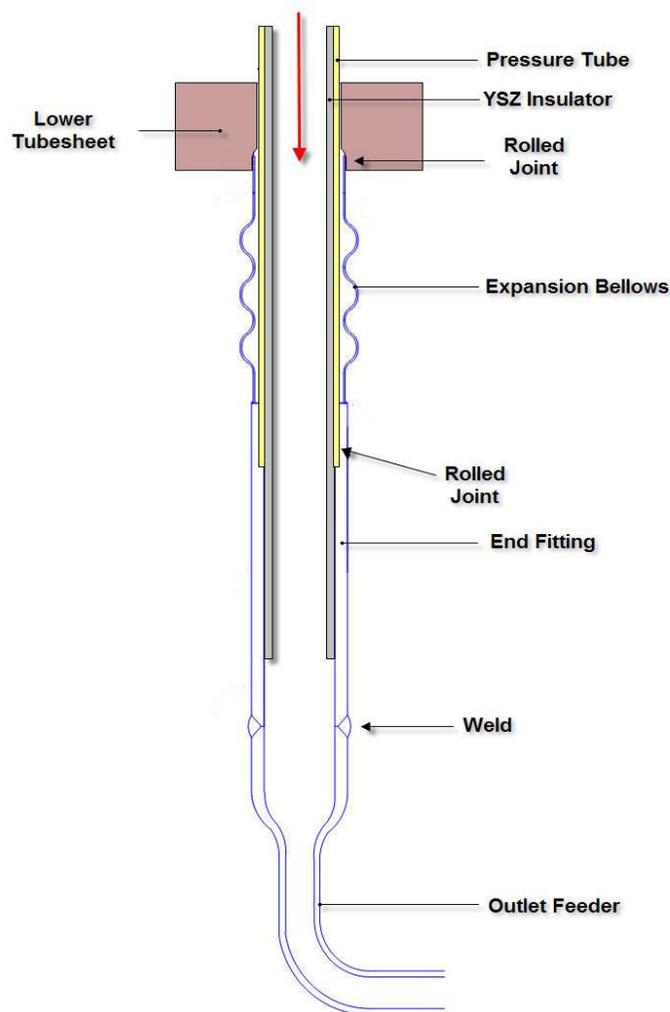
Details of Pressure Tube to Outlet End-Fitting Connection.
